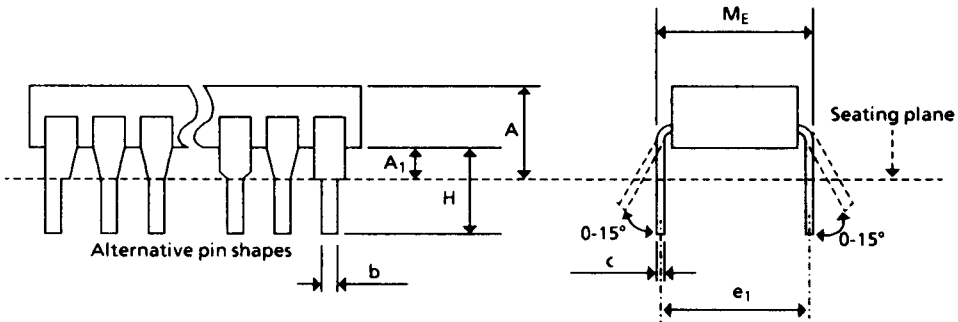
64-Lead Ceramic DIL (solder seal) - package style C
